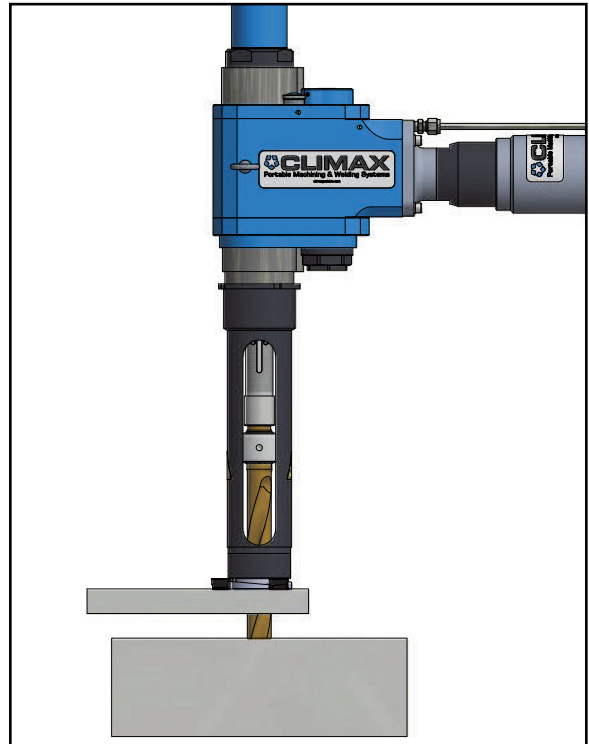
DRILL, TEMPLATE, AND WORKPIECE
